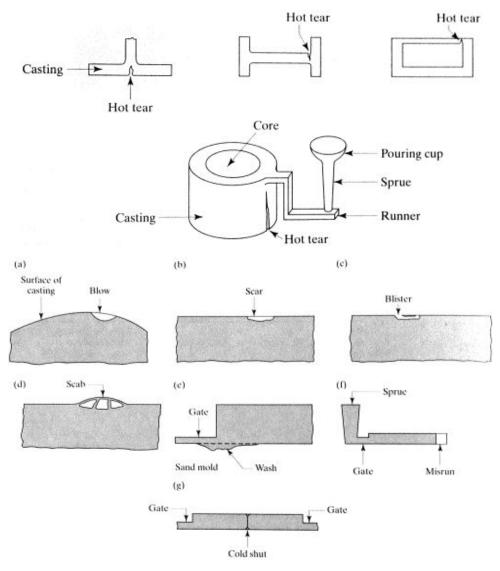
Typical defects in casting [source: Kalpakjian & Schmid]
